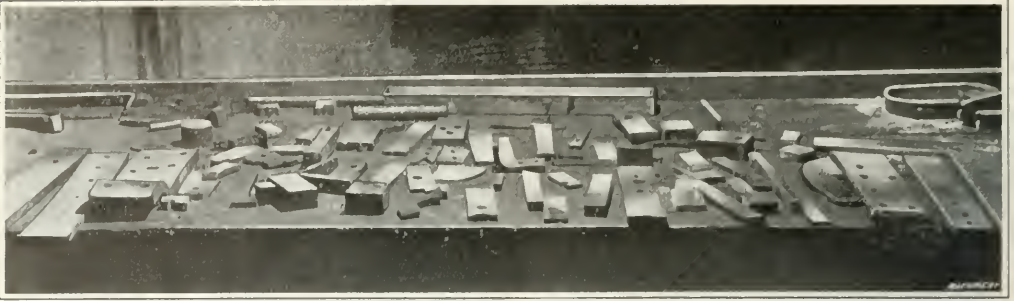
Miscellaneous Clamps and Blocking required in Welding
